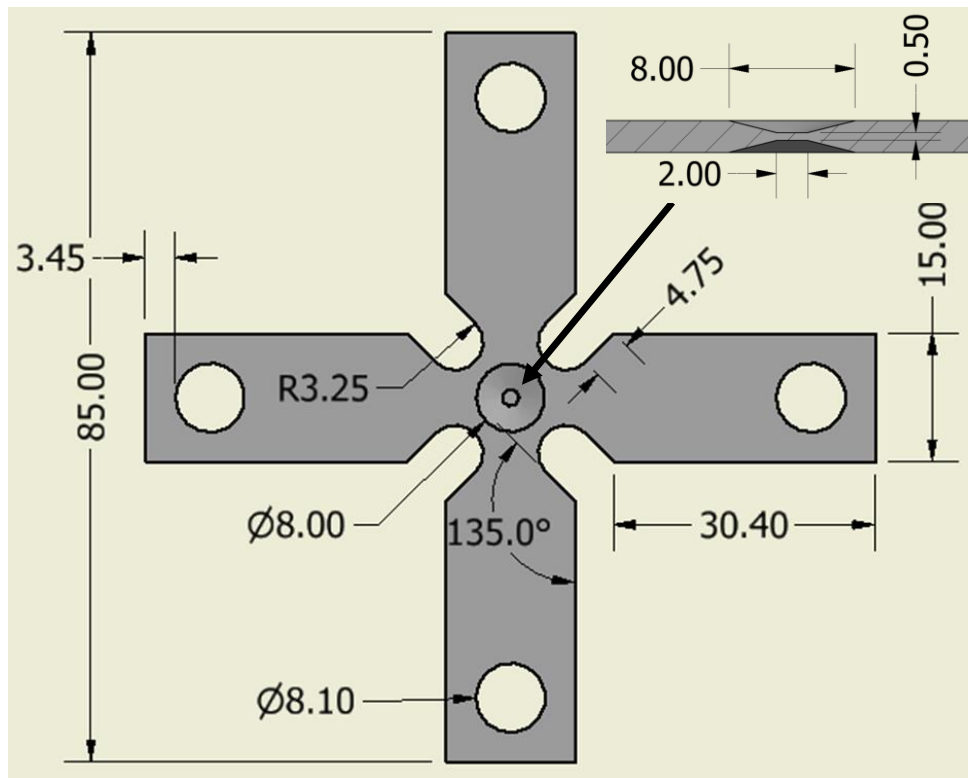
Cruciform sample and pit design resulting in center fracture. Dimensions are in mm.
